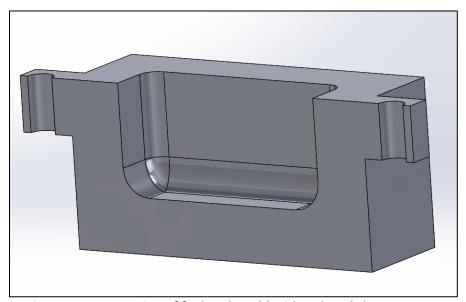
Cross-section of fuel tank mold with reduced sharp corners
